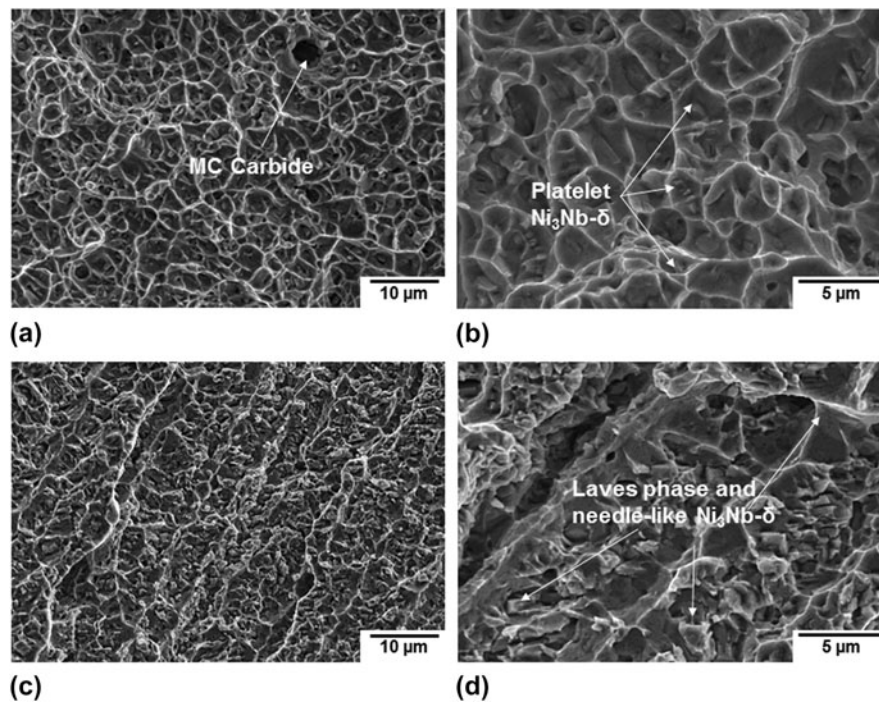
Typical tensile fracture surfaces of the (a, b) PM and (c, d) laser deposited IN718 (taken from a DLD-PM coupon).
